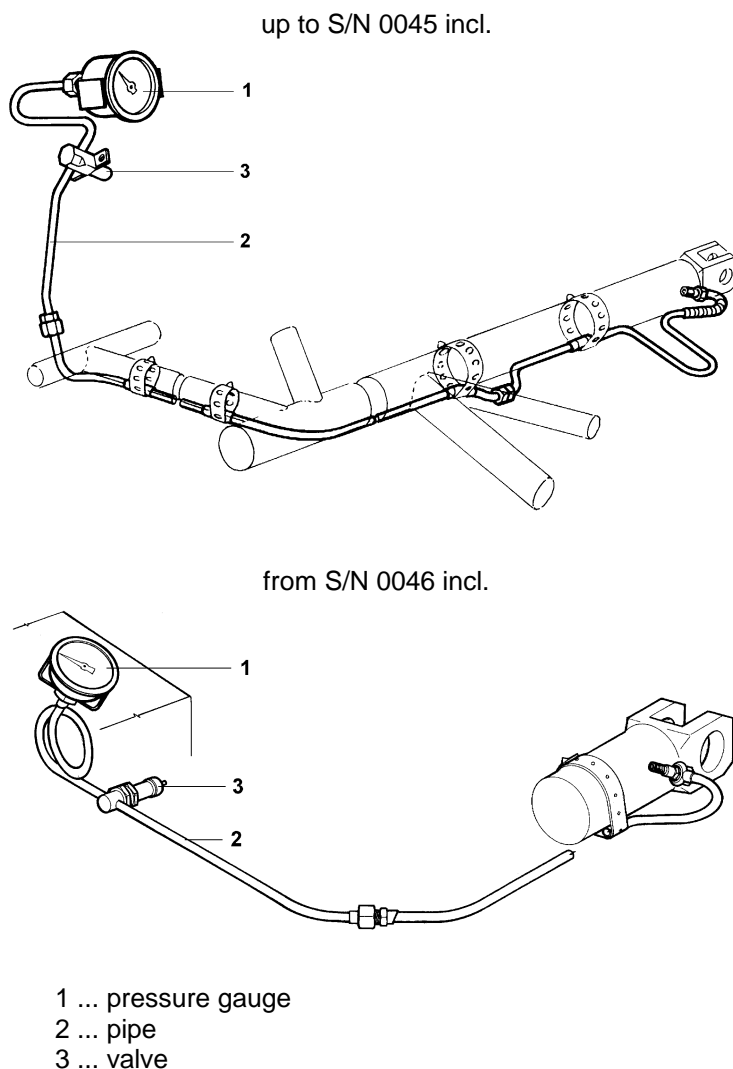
Pressure check of lower flange plate of center section of main wing spar
